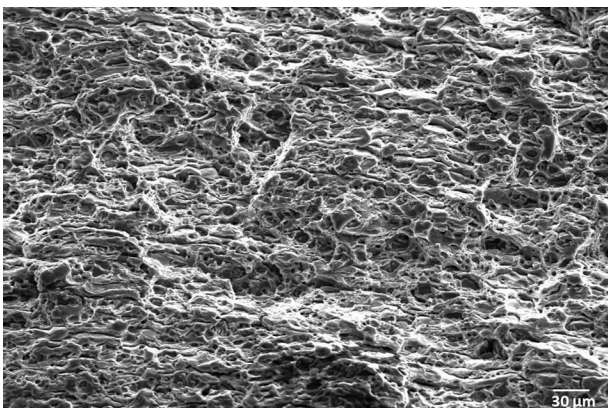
High magnified image of the fracture surface shown in Fig. 17
